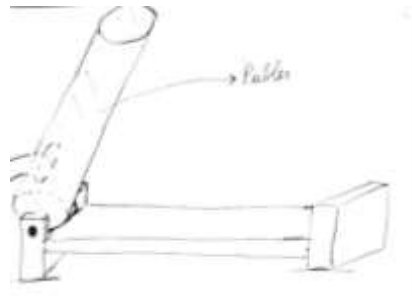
Cylindrical flip-up clamp with rubber grips.
